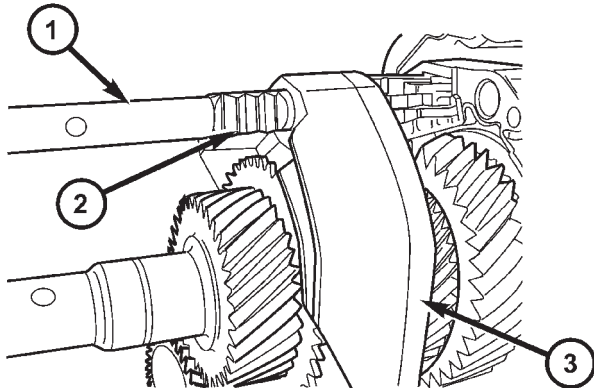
SHIFT SHAFT LEVER AND BUSHING ROLL PIN
